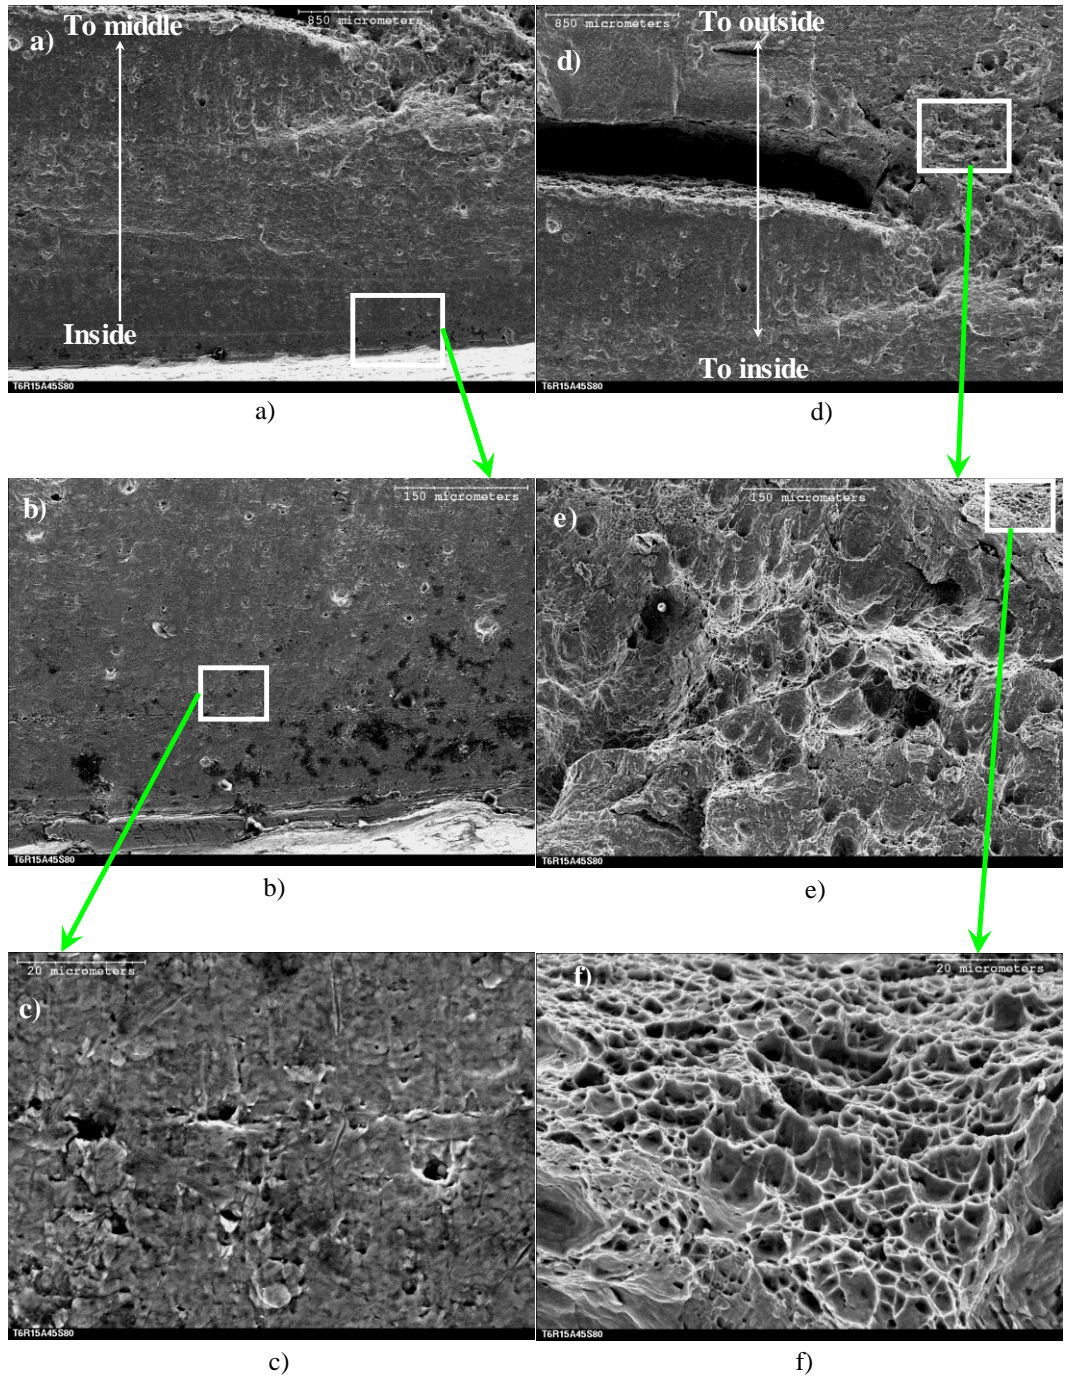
Bottom half of the fracture surface of specimen T6R15A45S80 (SEM)
